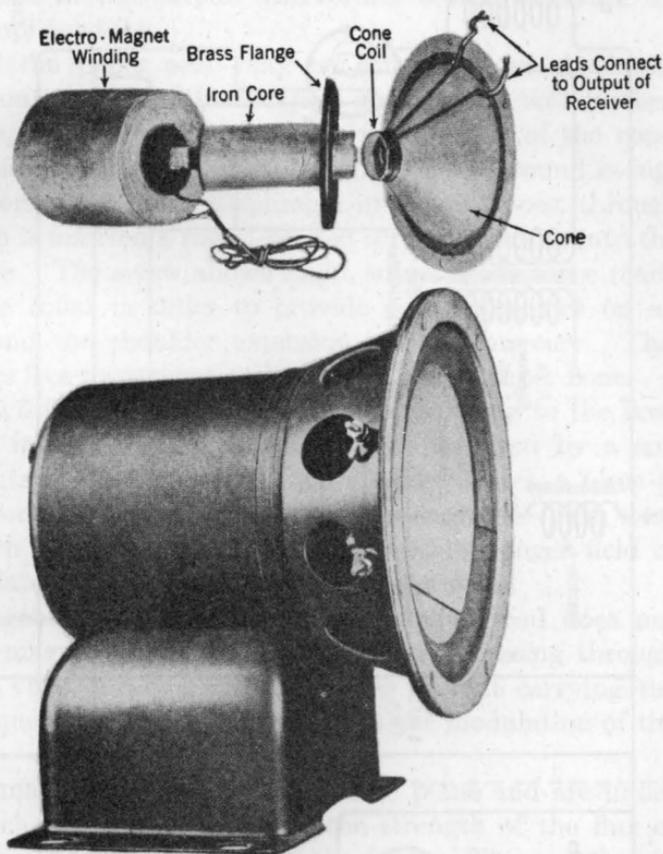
The three essential parts and complete assembly of the electrodynamic type loudspeaker.
